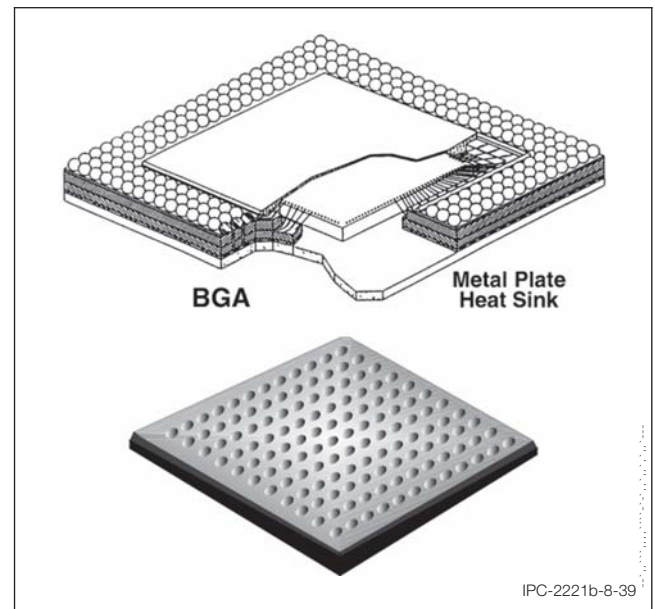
through Figure 8-41 illustrate examples of area array devices. For more information on these devices and their interface to the printed board, see IPC-7095 and IPC-7351.
